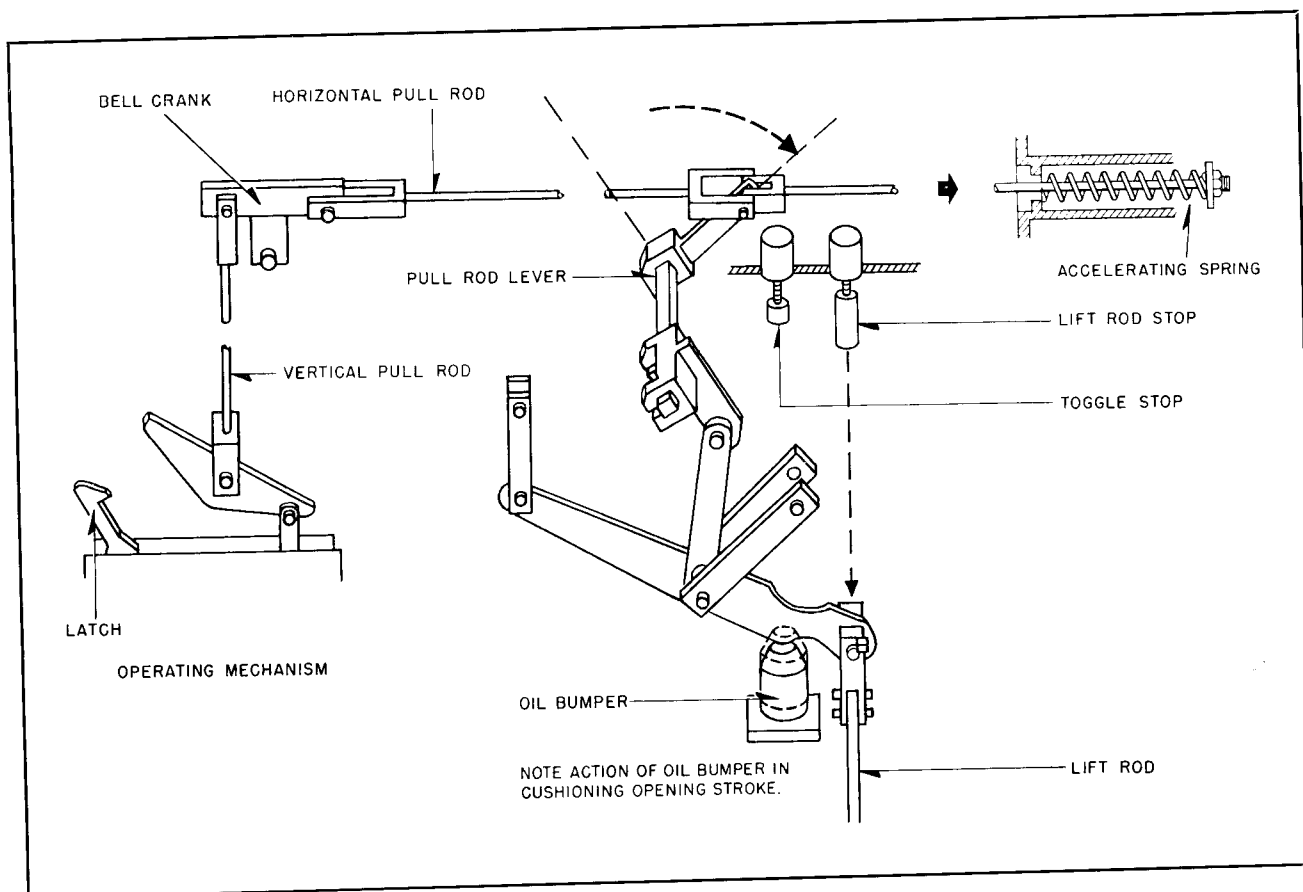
Opening Stroke of Pole Unit Lever Mechanism
